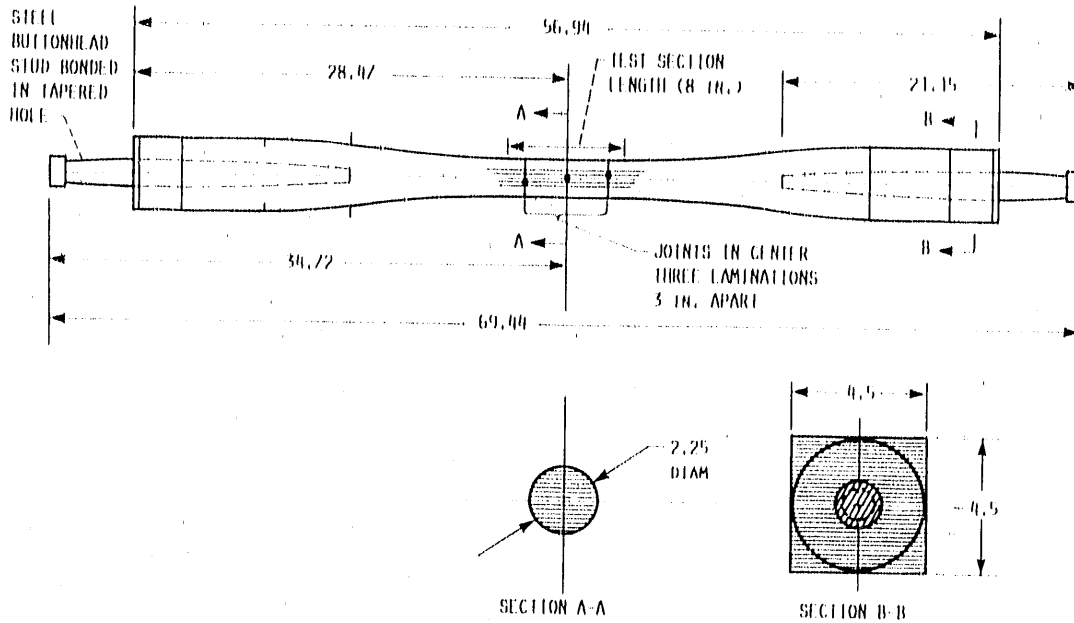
Dogbone test specimen for fatigue testing. (Dimensions are in inches.)
